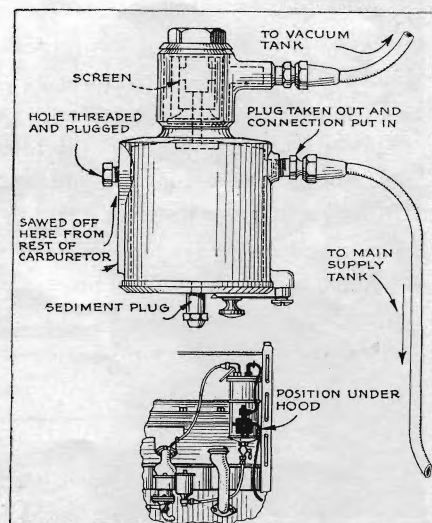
Old carburetor, with float and mixing chambers separate, makes good gas strainer.
